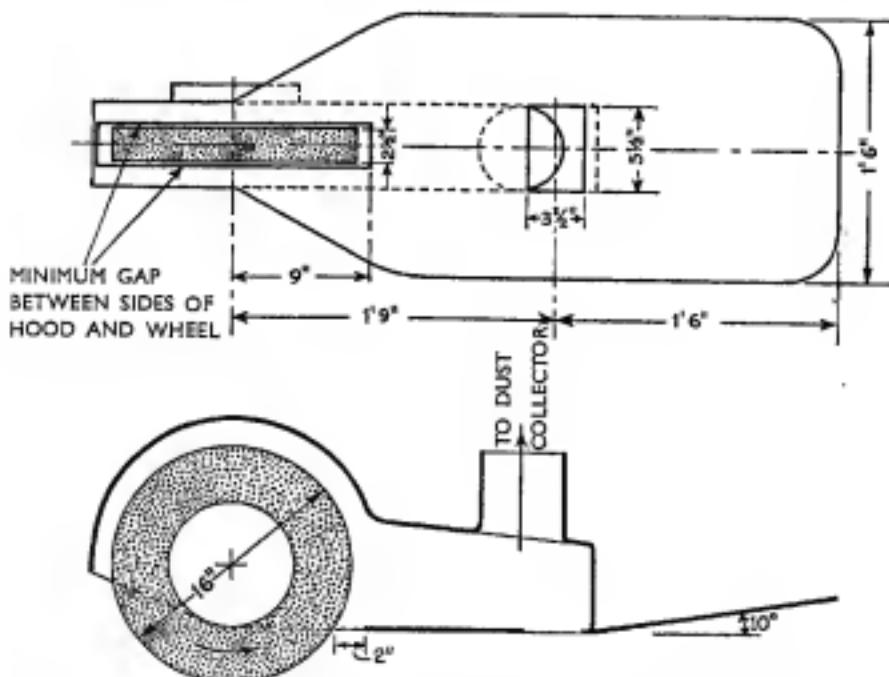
(b). Design of the exhaust hood, showing the sizes and positions of the intakes and the flange.
